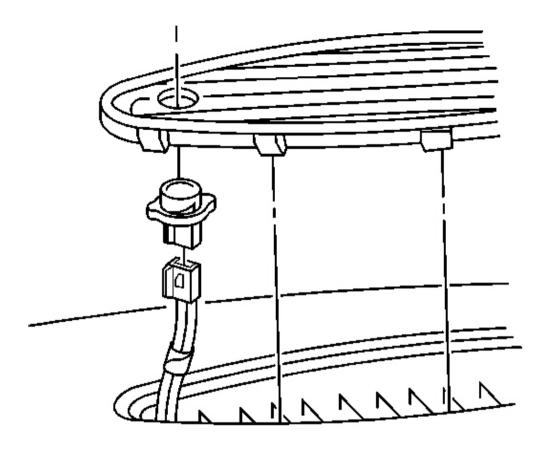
Electrical Connector To DRL Sensor Courtesy of GENERAL MOTORS CORP.
